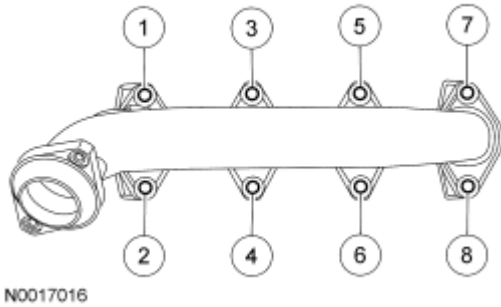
Tightening RH Exhaust Manifold Bolts In Sequence
